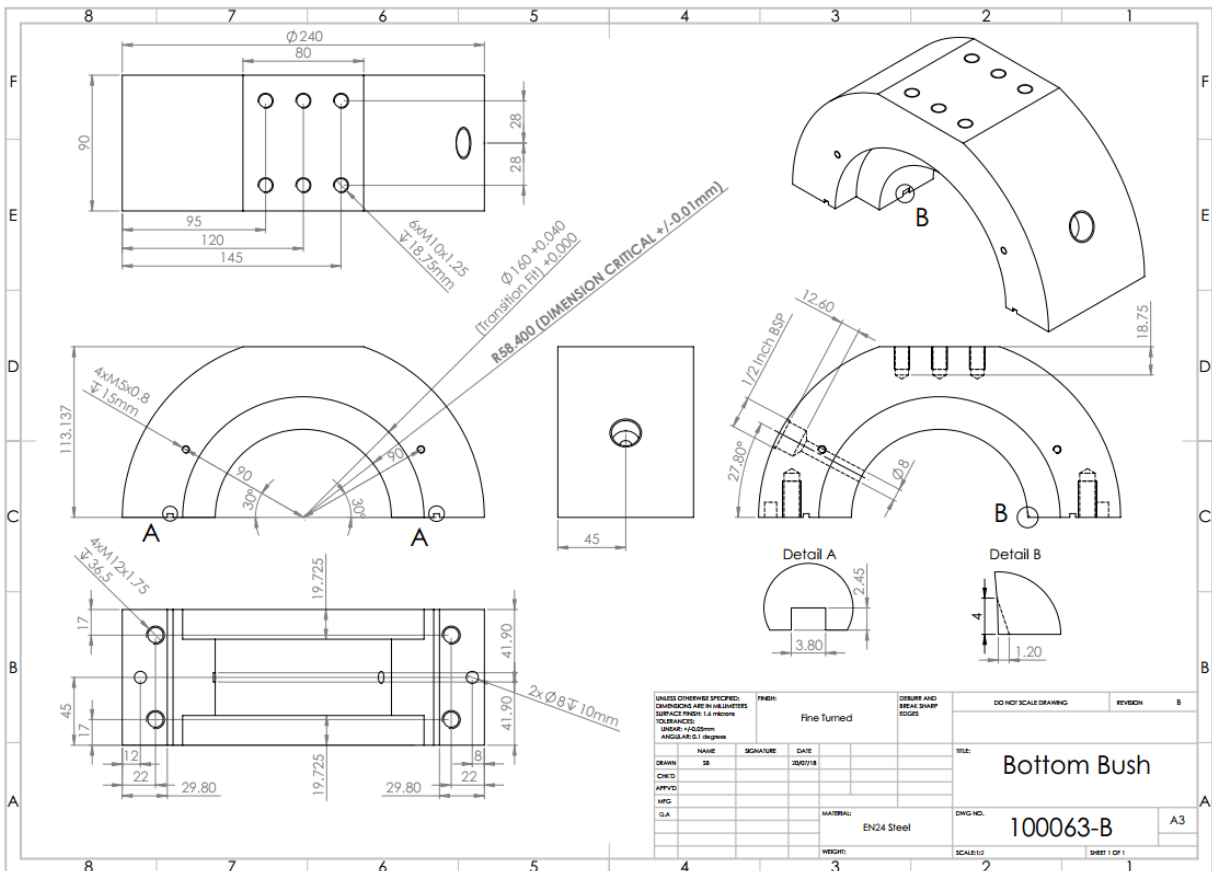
Machine drawing of bearing assembly bottom bush.
